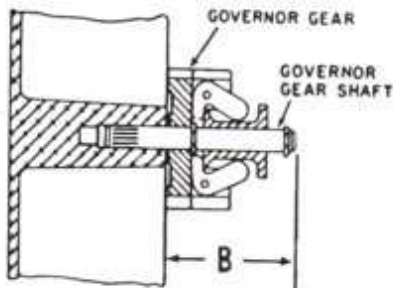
View showing installation of governor shaft and governor gear and weight assembly on Models HH80, HH100 and HH120. Dimension (B) is 1 inch (25.4 mm).
